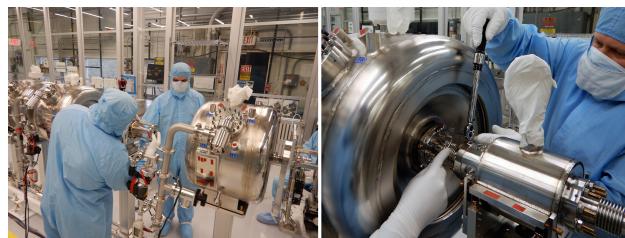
Positioning of the Al sealing in the flange groove (left), tightening bolts of a flanged connection (right).
